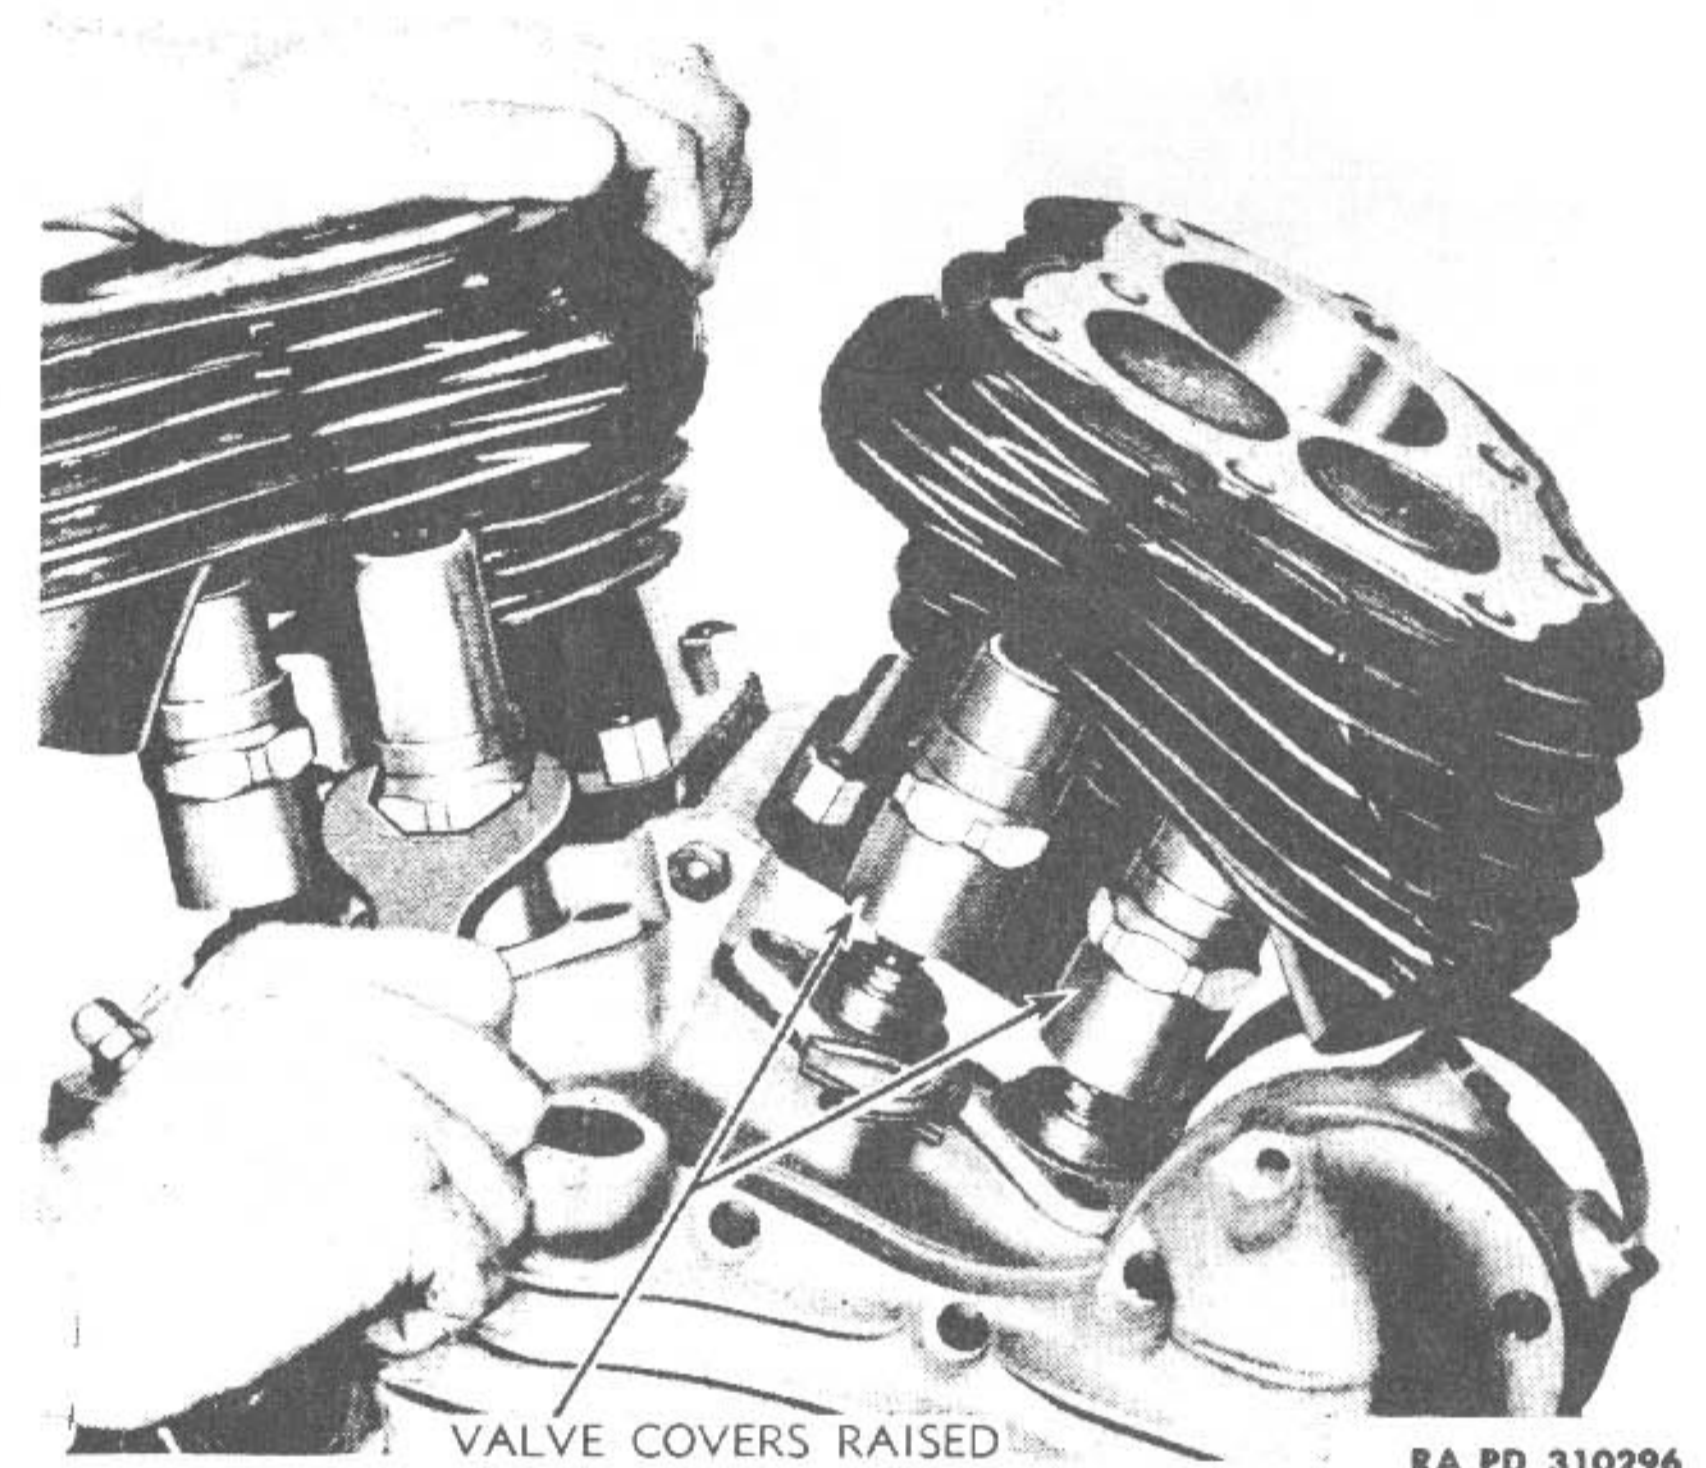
Freeing Valve Covers with Wrench (41-W-3617)
